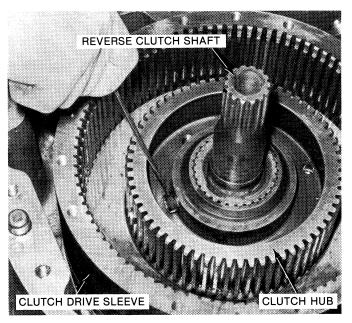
Removing or Installing Dowel Pin Screw on Clutch Hub.
